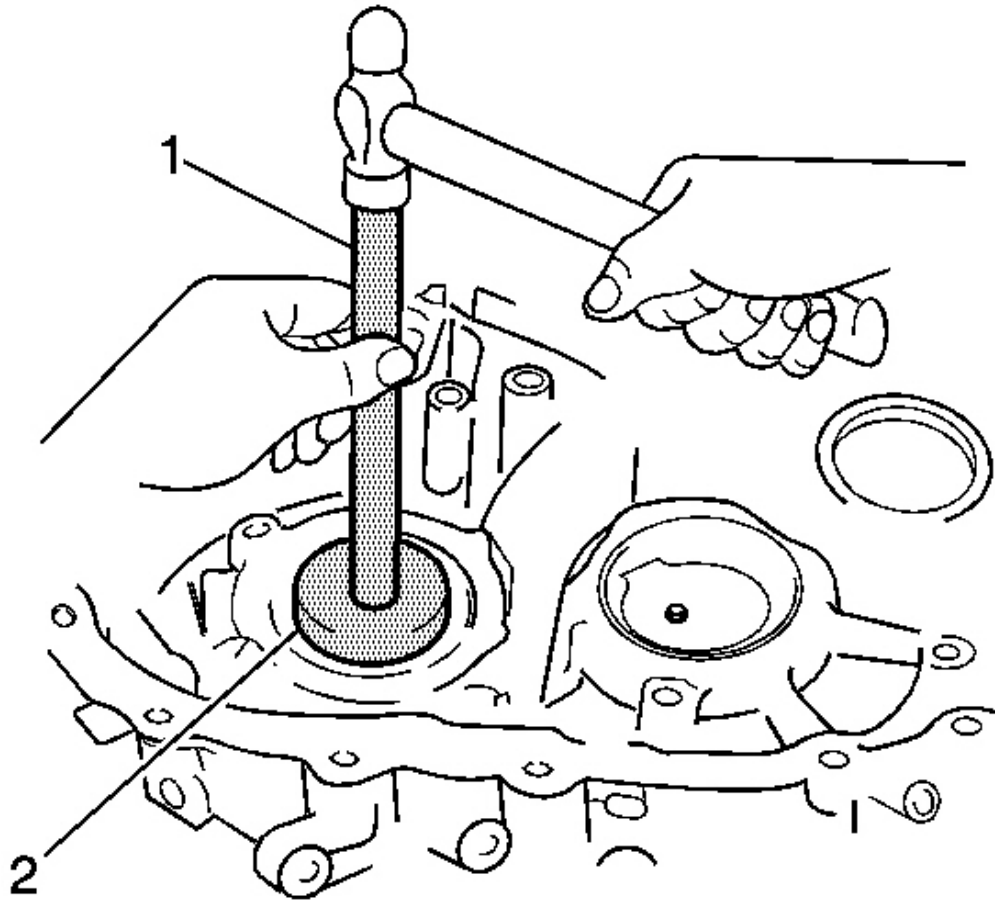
Installing Side Bearing Outer Race & Transaxle Housing Using DT 46462 & DT 46465
